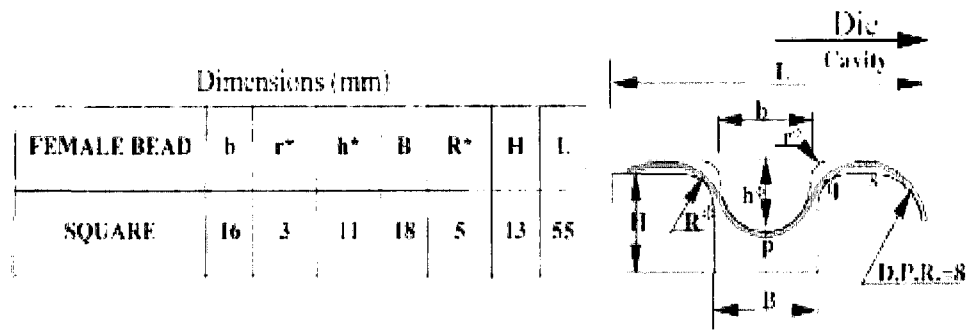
Complete Specifications and Dimensions of the Drawbead
